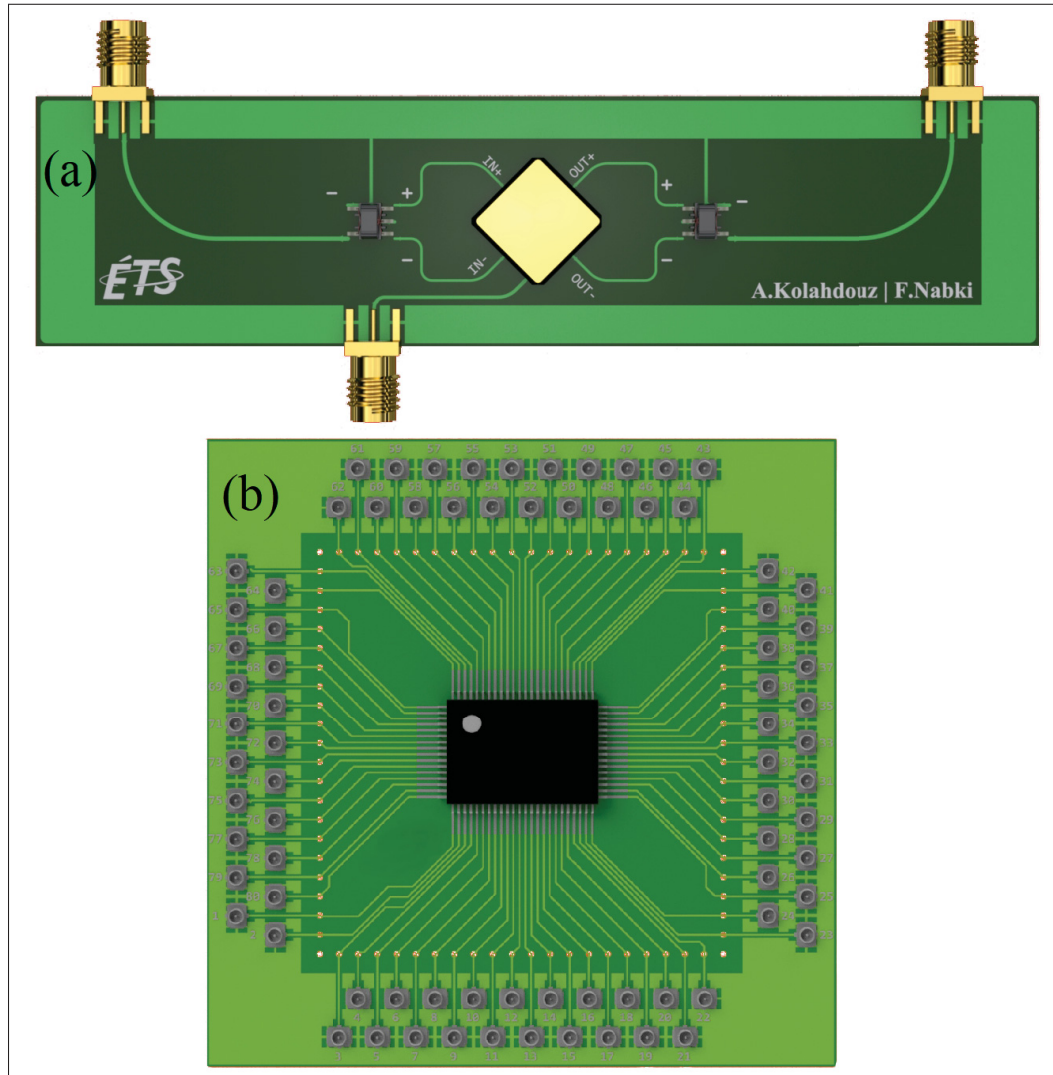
(a) Low feedthrough capacitance PCB with the LCC-28 package , SMA connectors and integrated differential baluns (CX2074NL) (PCB1), and (b) large-scale testing PCB with the CQFP-80 package and U.FL outputs (PCB2)
